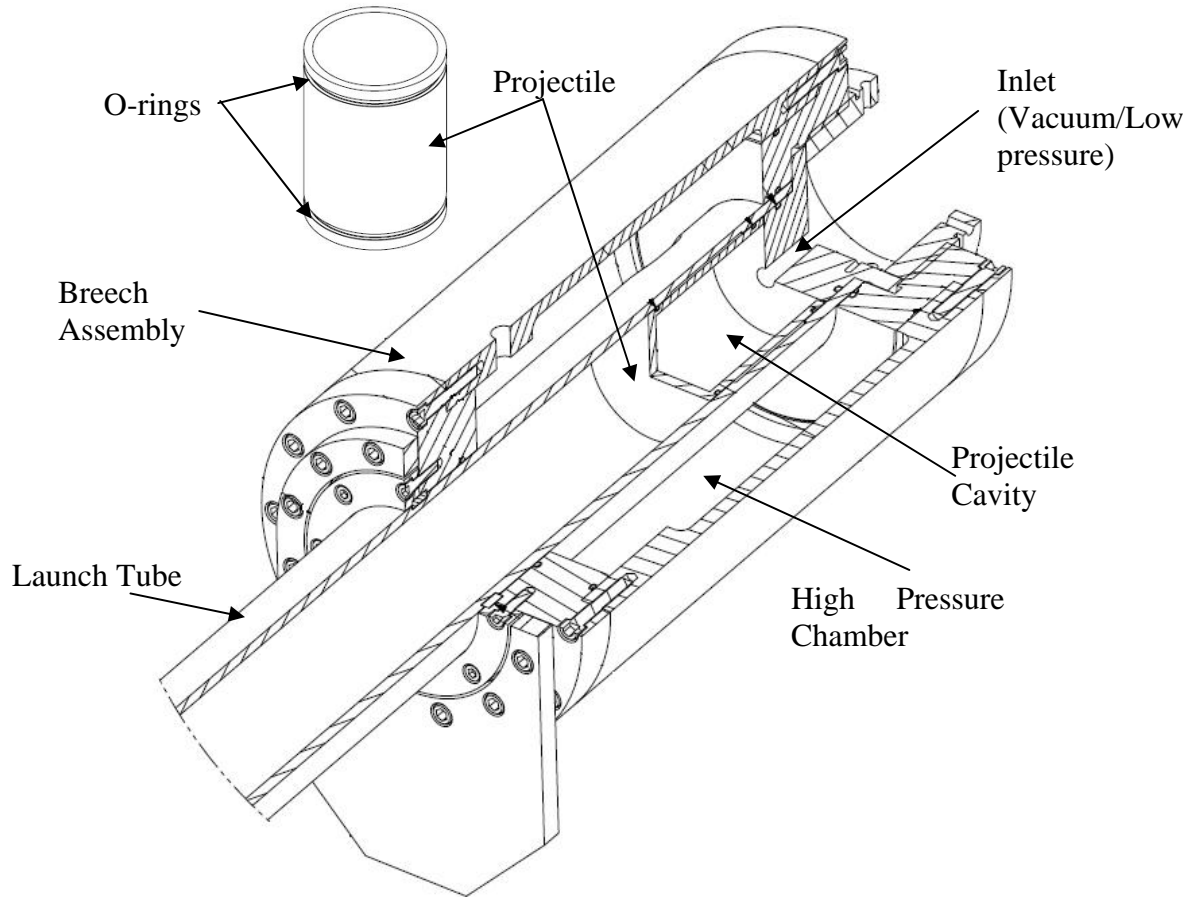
Breech assembly and projectile of gas gun (From Ho, 2009)
